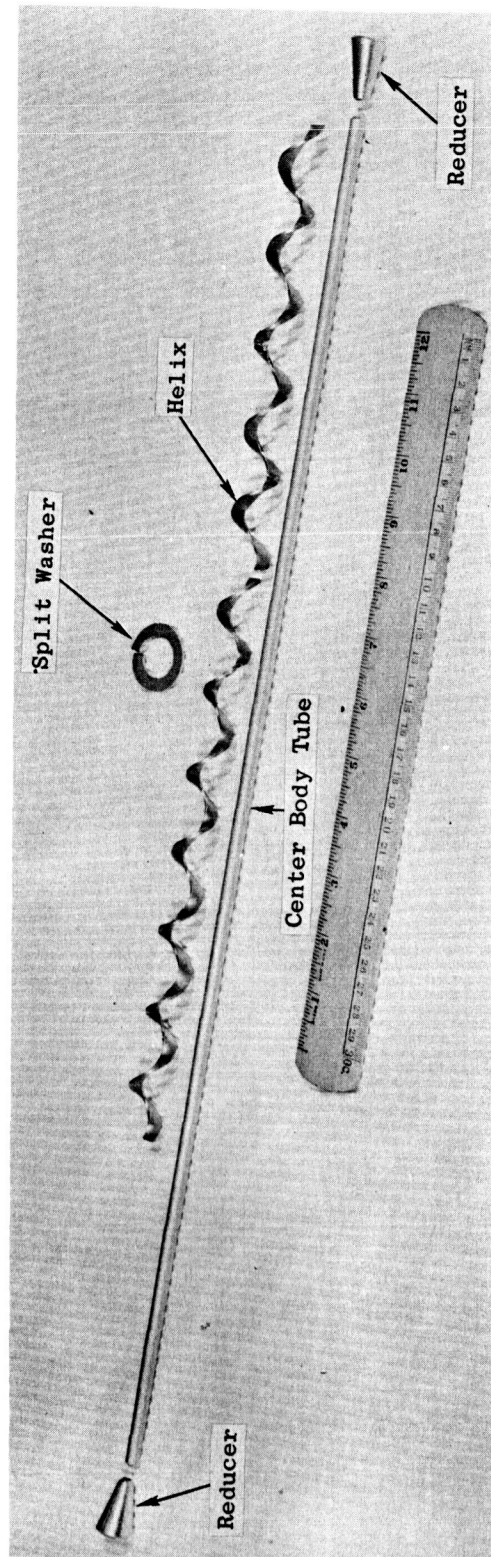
Component Parts of Helix (Test Section No. 4, 100 KW Facility).
